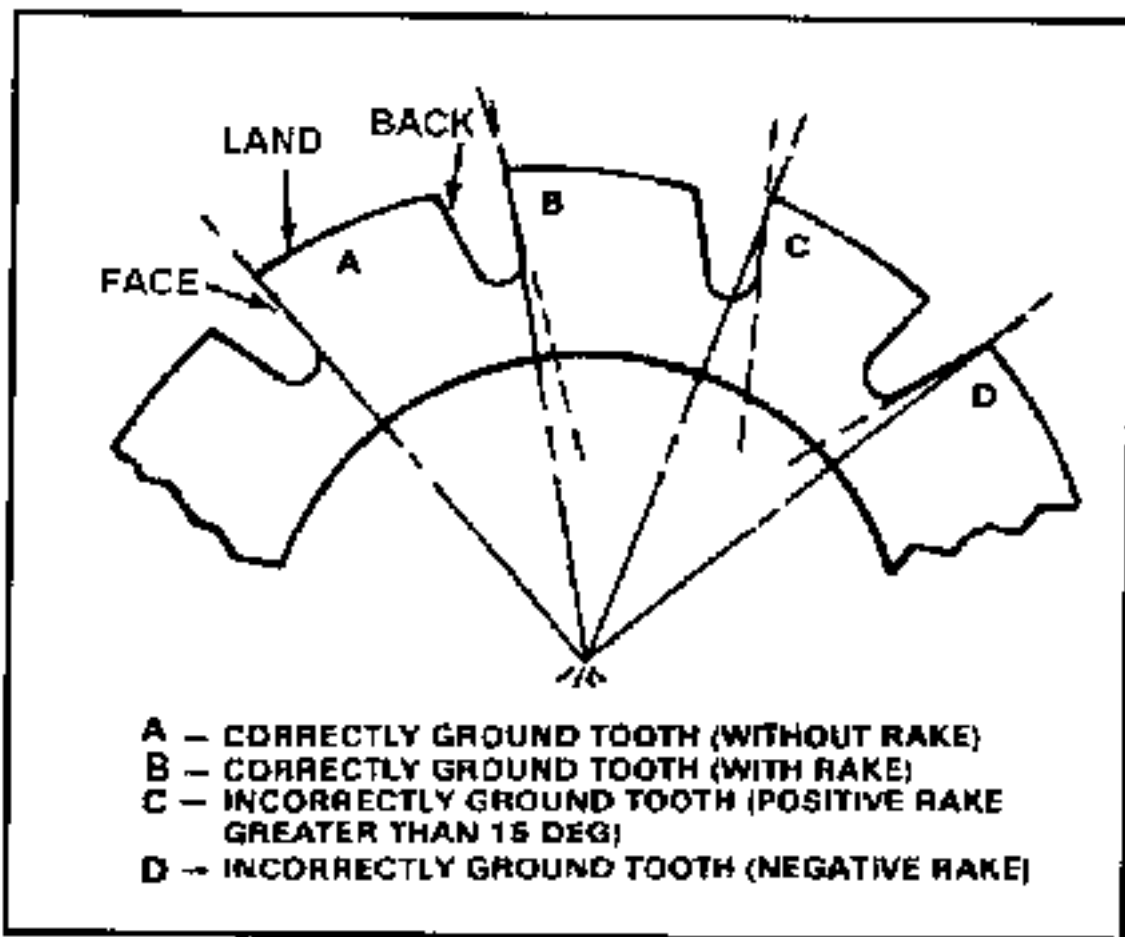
Correct and incorrect grinding of formed milling cutter teeth.
